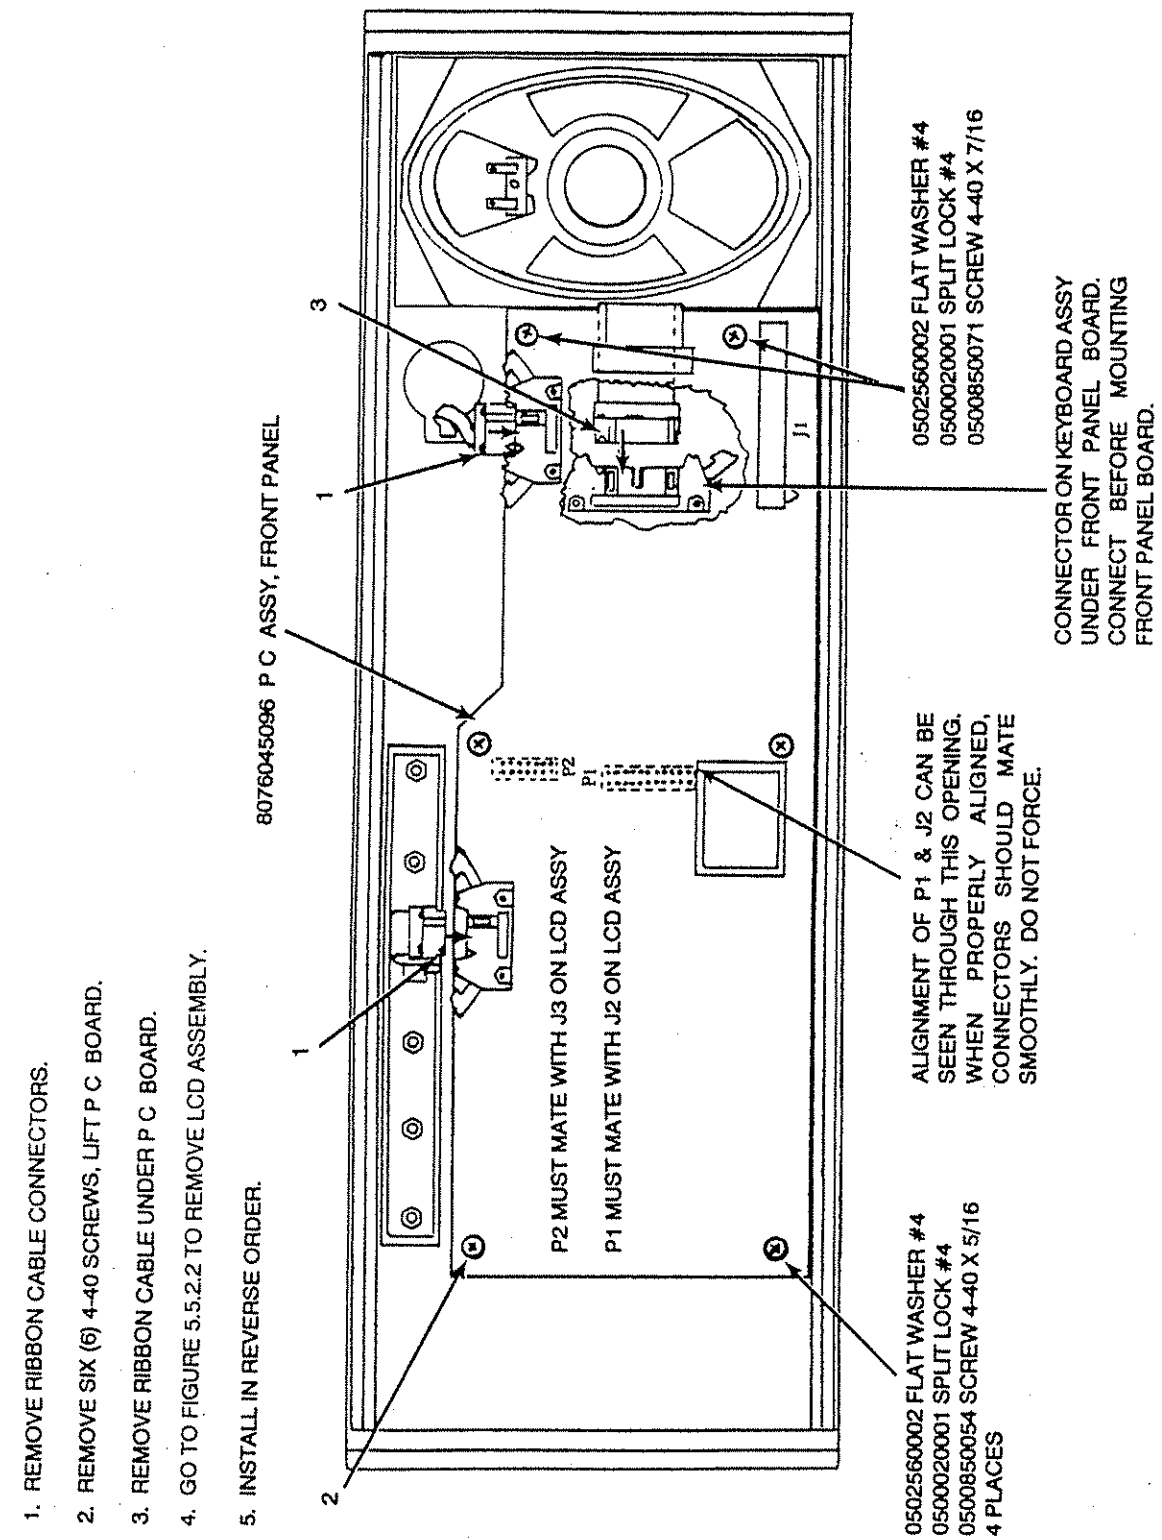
Removal and Installation of Front Panel PC Assembly.
